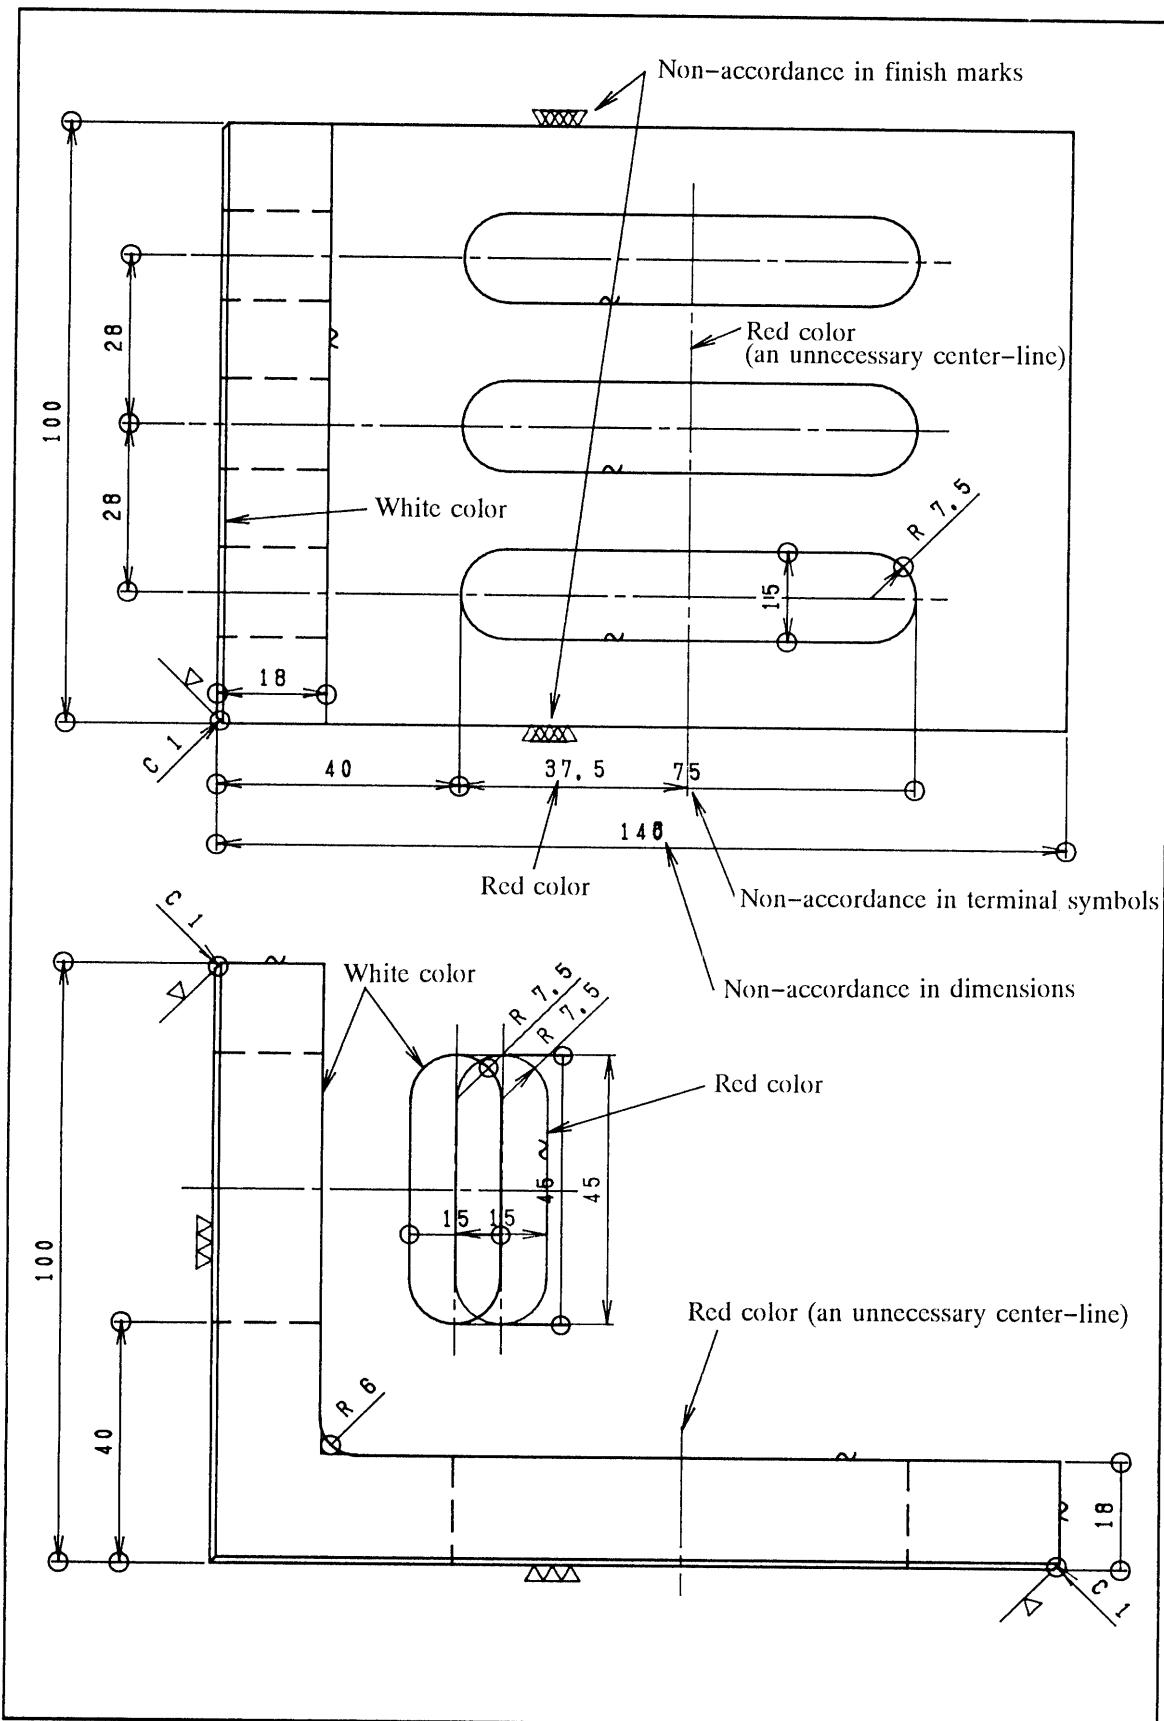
An example of overlapped drawings of a machine element of an angle-plate (Plane and front views of drawings to be checked: bottom, those of model drawings: top)
